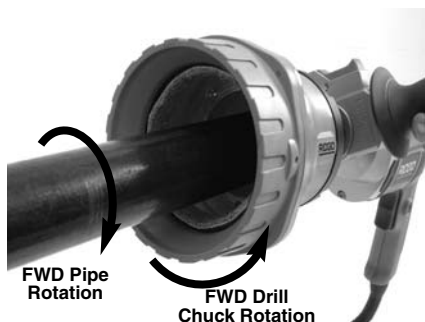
Proper Use of Prep Tool to Remove Pipe OD Burr With Rotating Pipe
